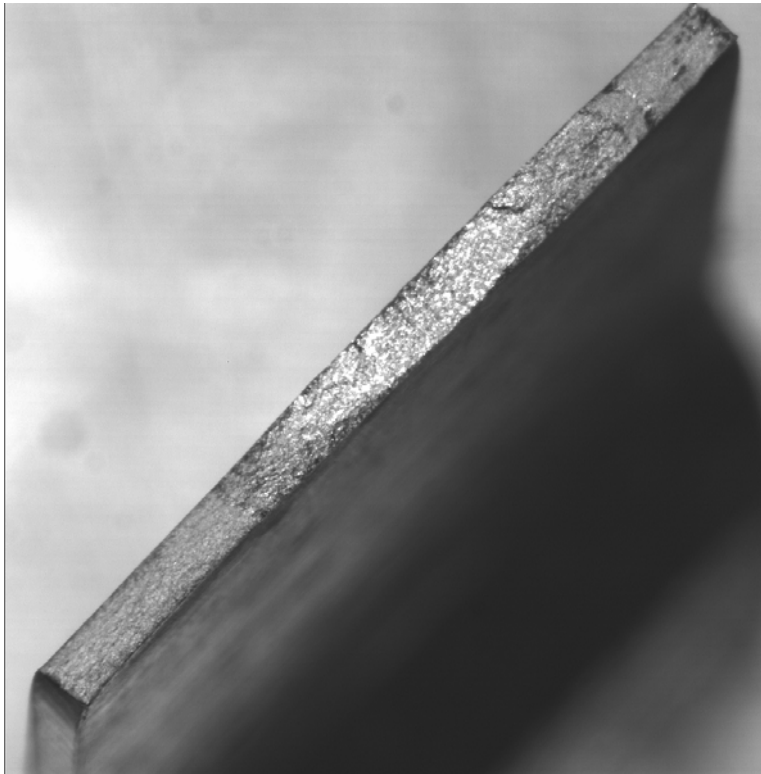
Fracture Surface of Specimen 5933.
